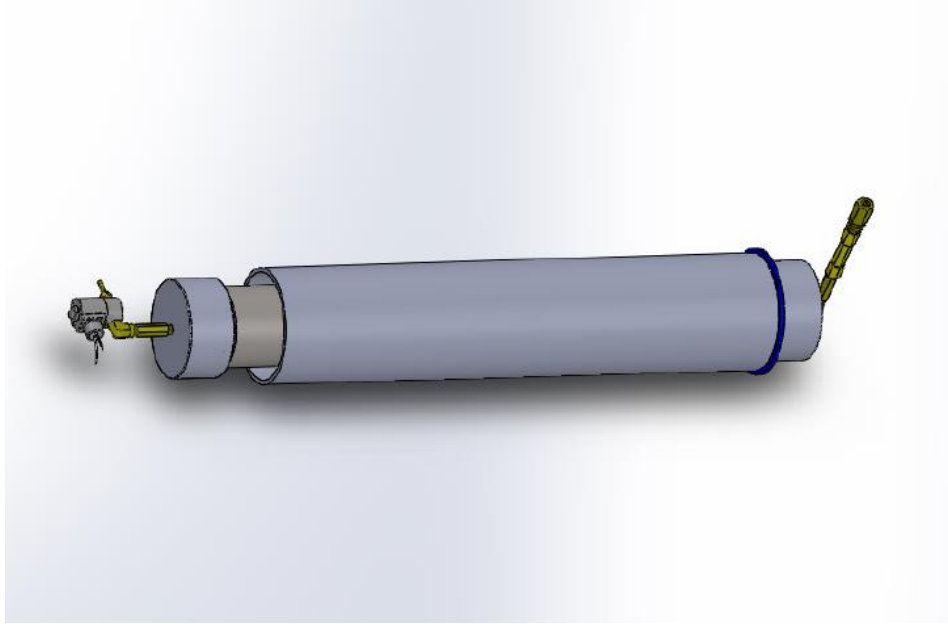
Rendering of the 4" hydraulic test specimen showing inner and outer pipes with attached endcaps and plumbing.
